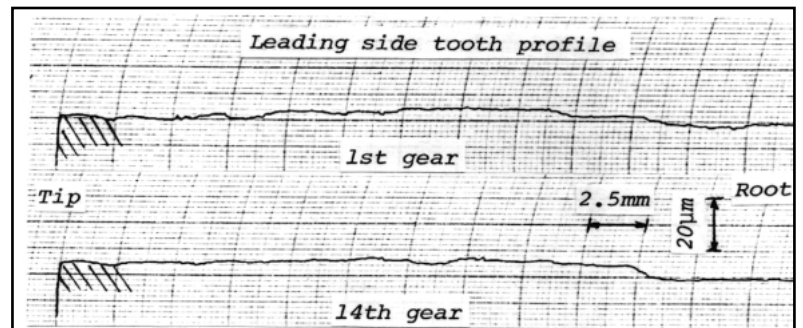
The tooth profile curves of finished gears with the cermet finishing hob.
